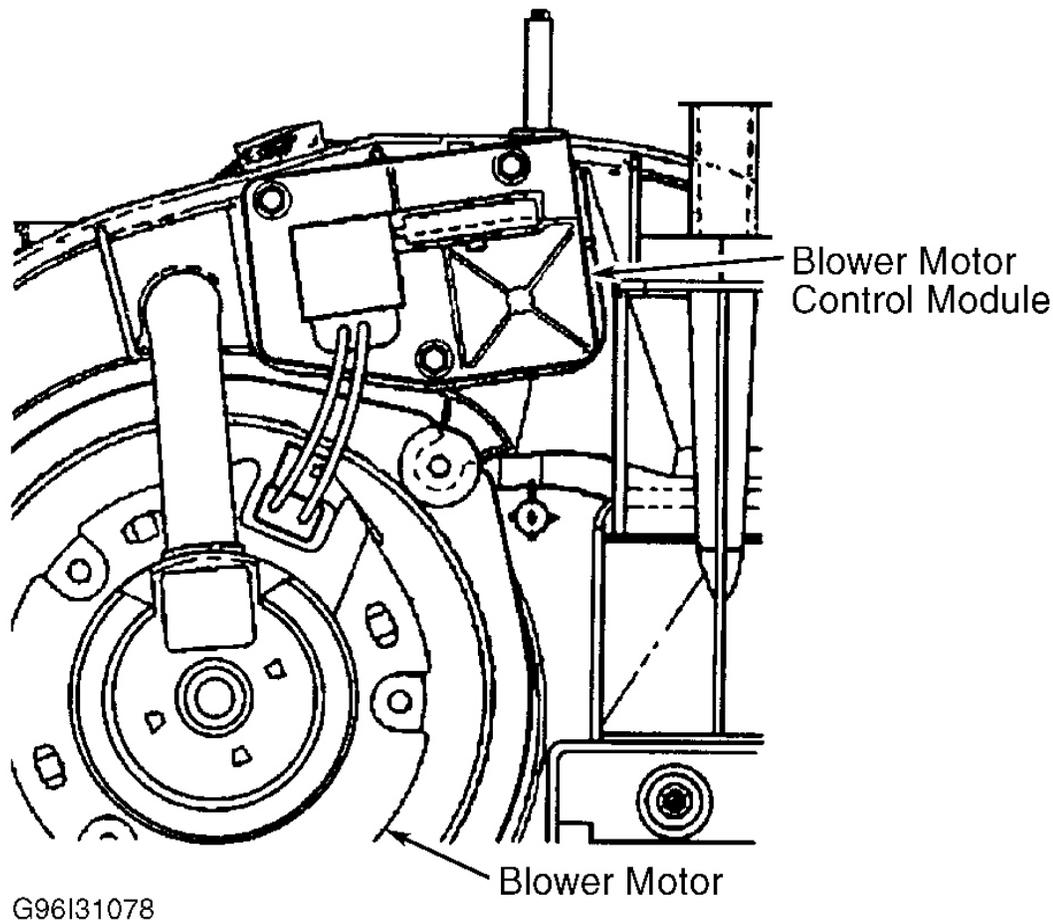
Identifying Blower Motor & Blower Motor Control Module
